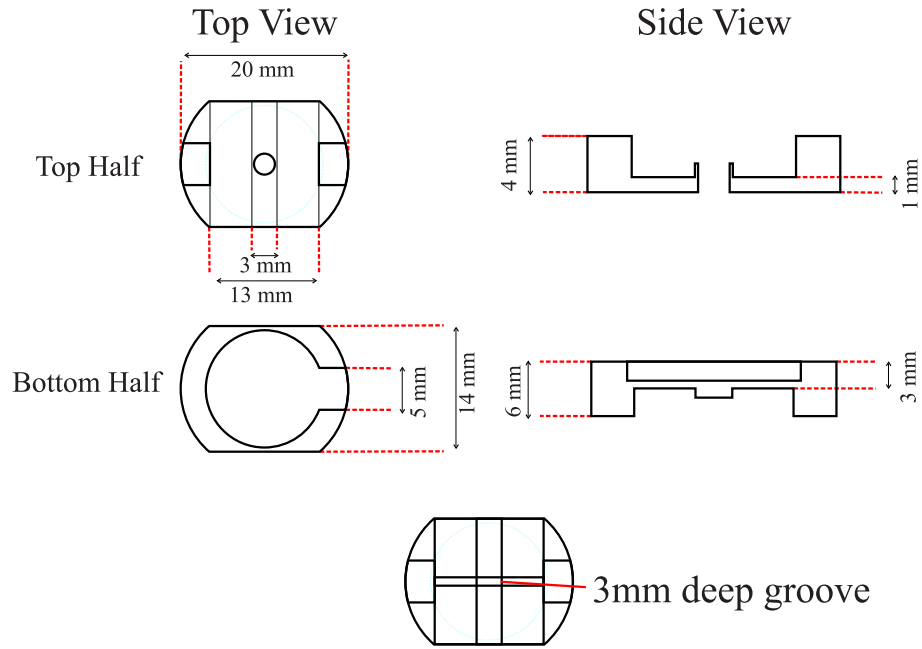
Top and Side views of both halves of the receiver coil former. The 3 mm deep groove in the bottom side of the lower half provides a path for the wiring to cross from one side to the other.
